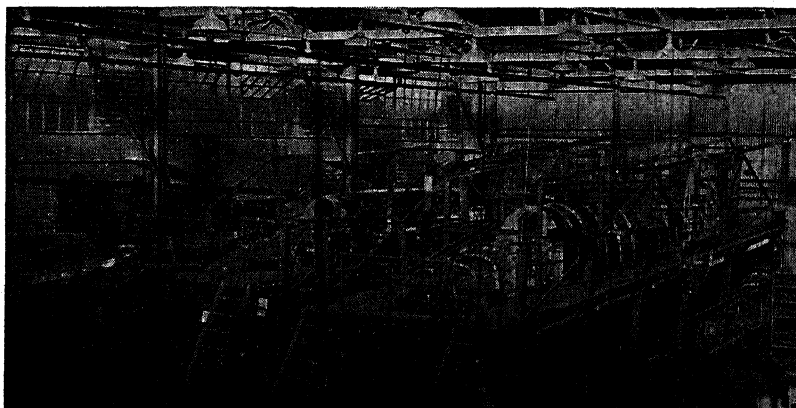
Arc welded fuselage jigs in a large Western plane factory used to build the plane shown in Fig. 1022.
